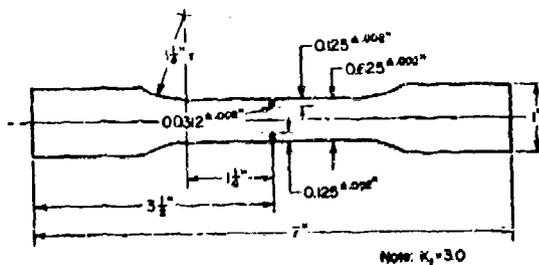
NOTCHED SHEET FATIGUE SPECIMEN
